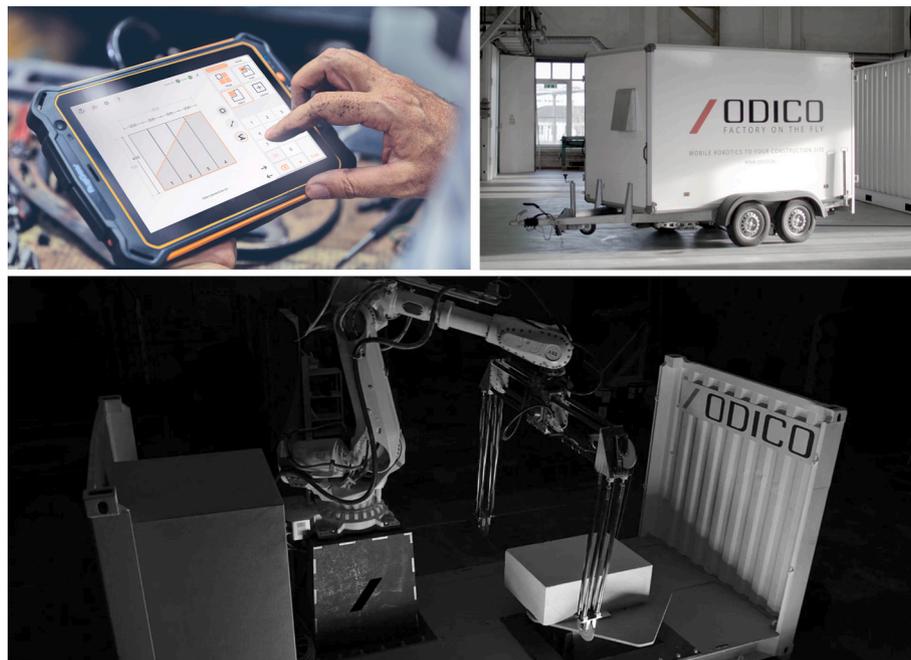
(top left) Robot sawing tablet interface; (top right) Robot sawing unit and (bottom) Wire-cutting unit.
